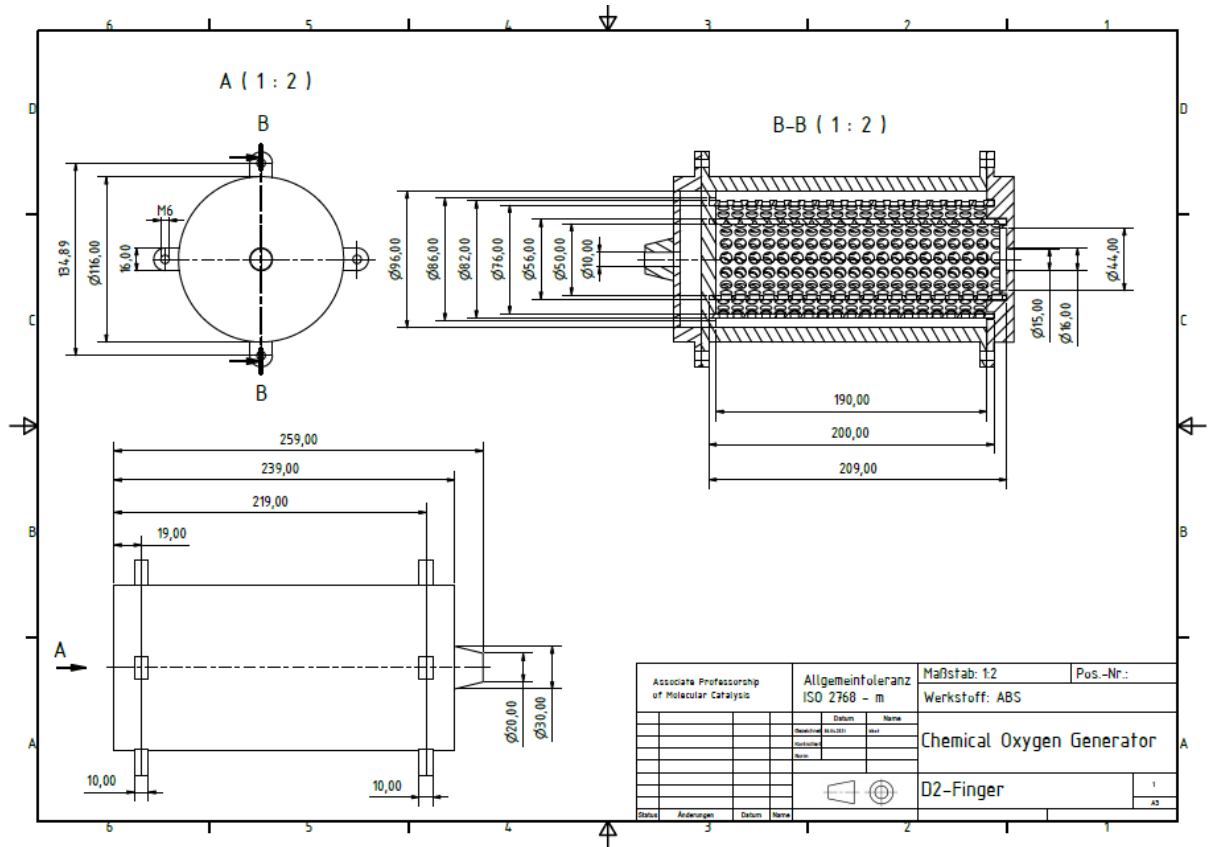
Technical drawing of the chemical oxygen generator prototype.
